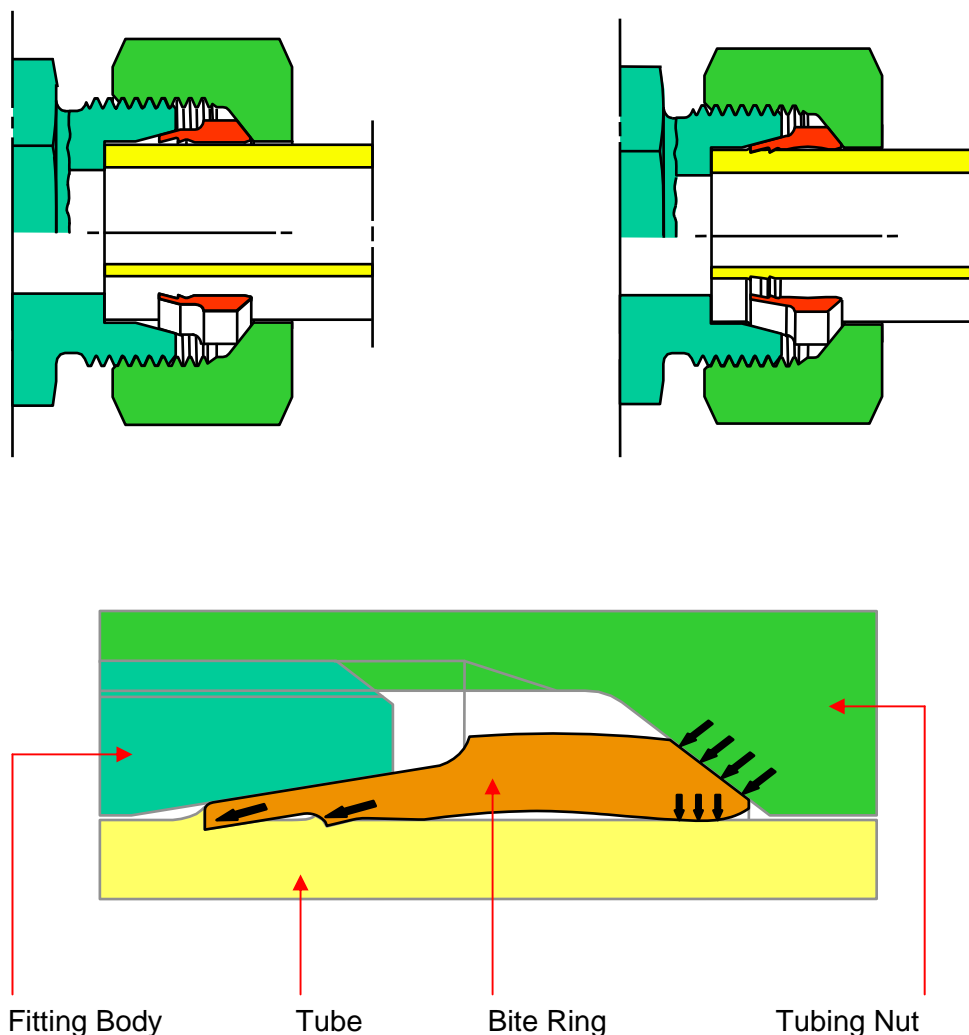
Deutsches Institut für Normung (DIN) 24° bite ring arrangement. Top images showing the unassembled (left) and assembled (right) conditions.
